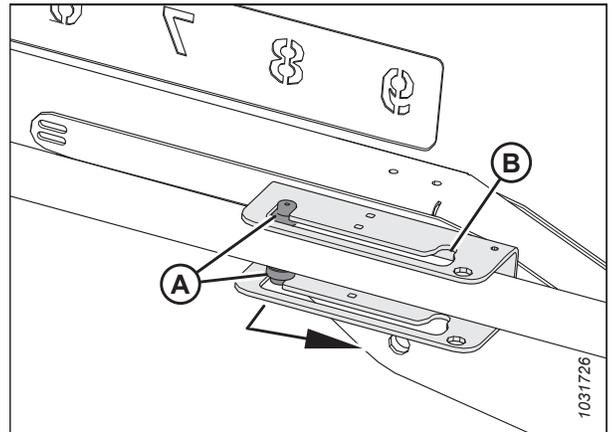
Fore-Aft Cylinder Adjustment Type 2 – Forward Position
